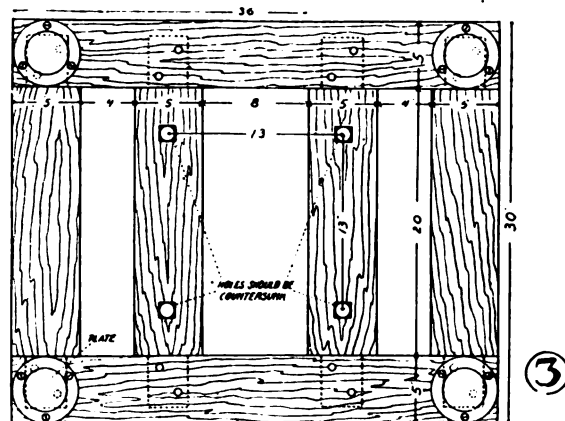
Construction and dimensions of the wooden frame and the position the springs occupy
